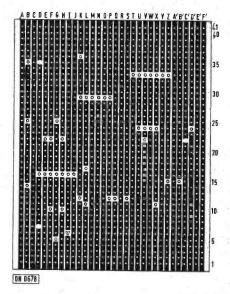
Before mounting components on the circuit board the copper rails must be broken as shown above.
